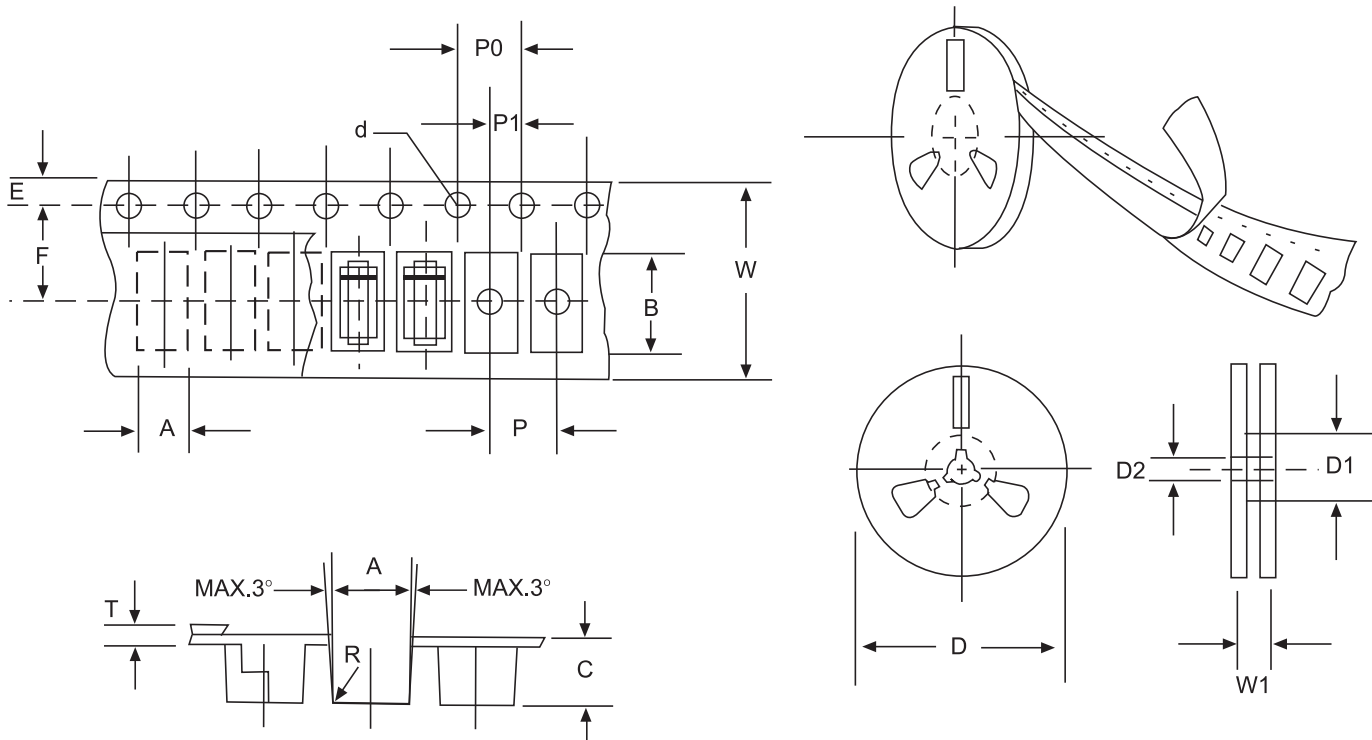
FIG: CONFIGURATION OF SURFACE MOUNTED DEVICES TAPING
